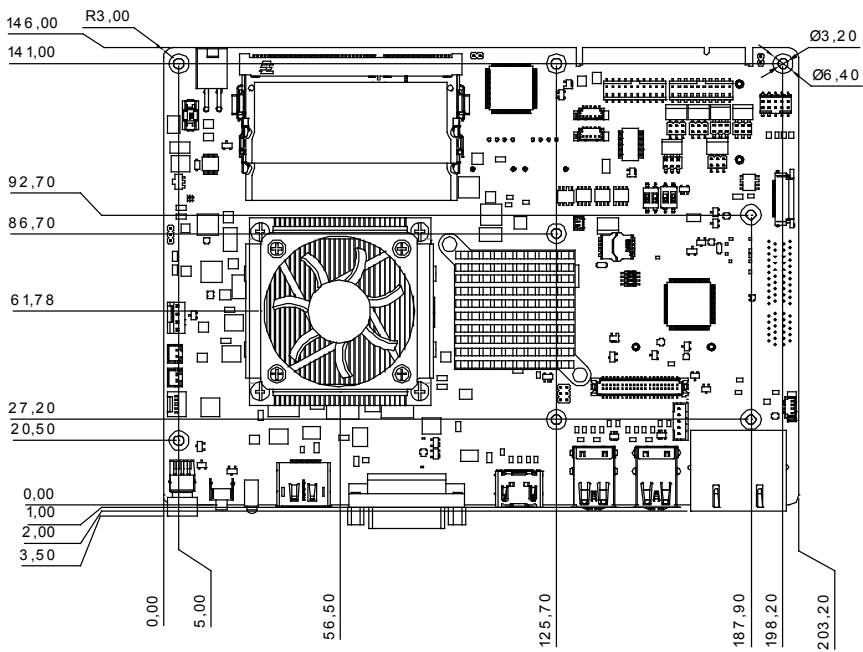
MIO-9290 Mechanical Drawing (Top Side)
